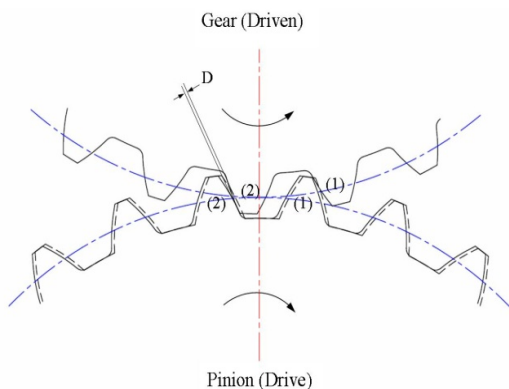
Schematic diagram illustrating the mechanisms of gear tooth impact
